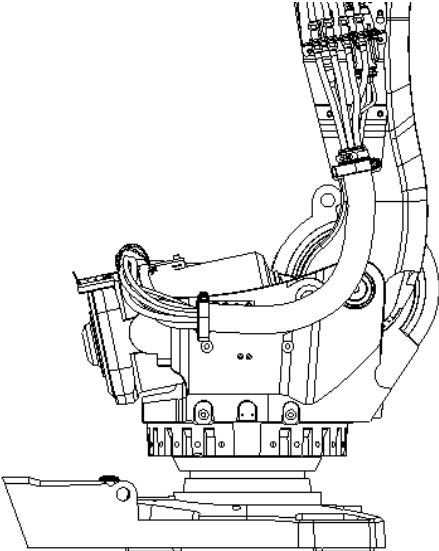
"Orange line" DressPack Lower arm left side view Spotwelding.
